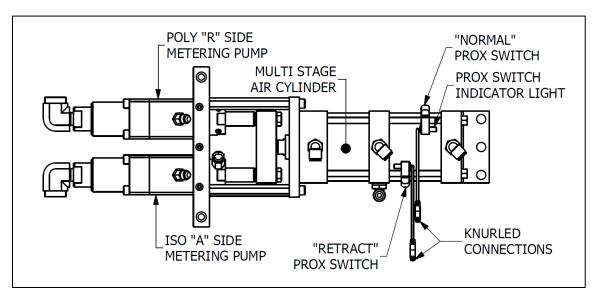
Top View of Metering Pump Line (PF-1600 Shown)
